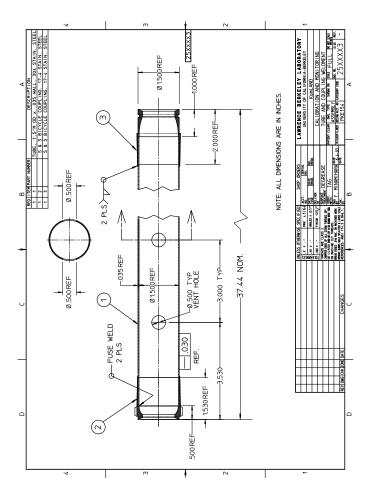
Technical drawing of a welded tube segment. Note: The weldment drawing is for the stainless steel couplings which fit onto the OD of the tube. The titanium couplings fit in the tube ID.
